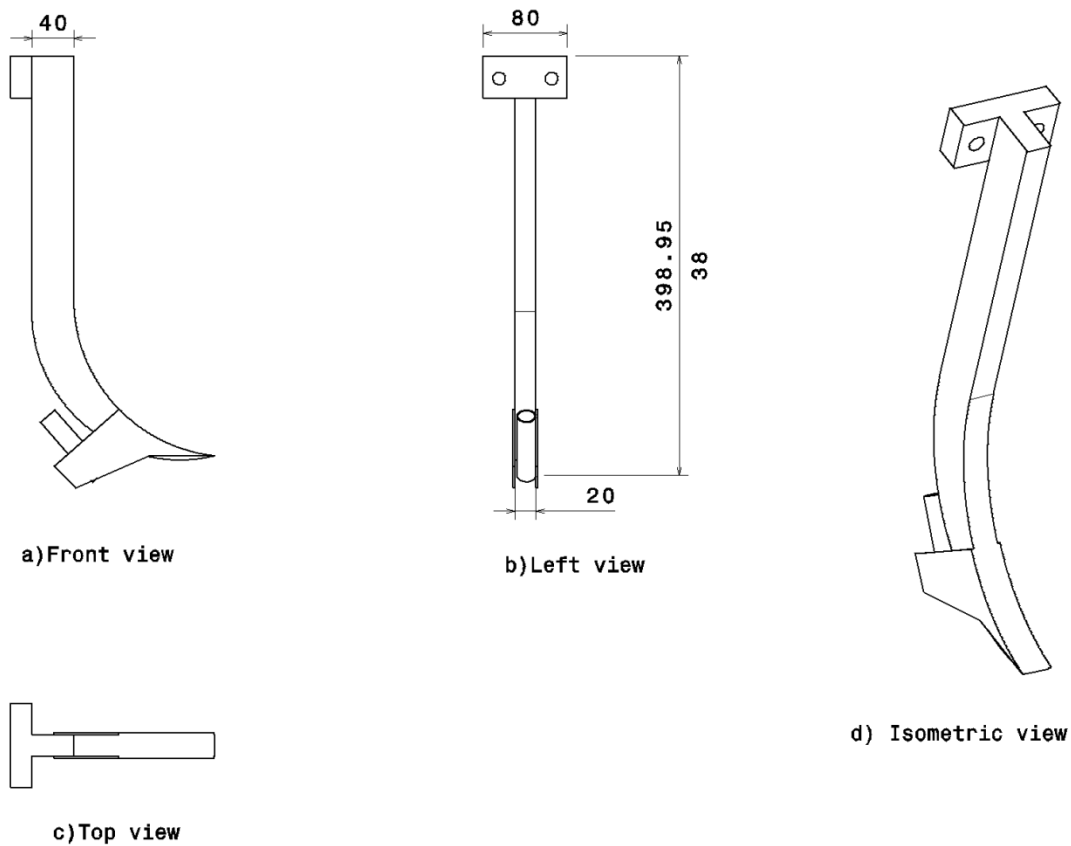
Design of shovel type furrow opener (dimensions are in millimeter)
